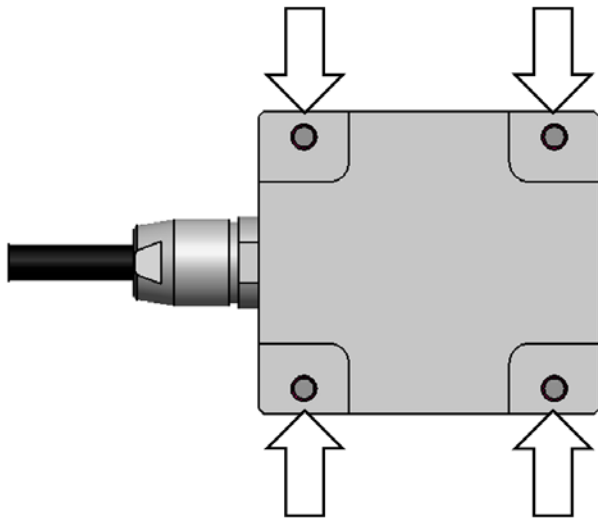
M2.5 holes in the bottom of the S-335 for mounting onto a surface
